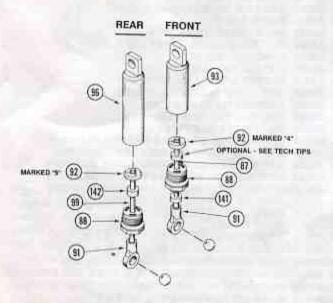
Note: The bottom of the rear shock now mounts to the top outside hole of the rear arm (1 & 123).
